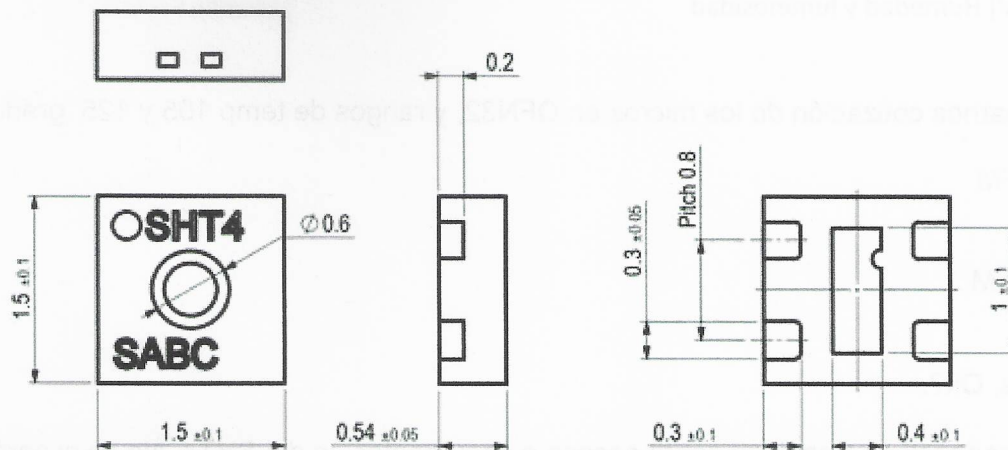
Dimensional drawing of SHT4x including package tolerances (units mm).
